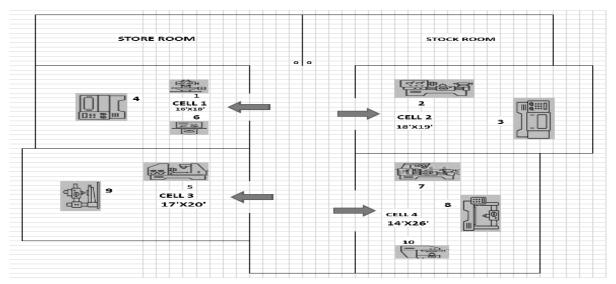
Cell layout design for Bench mark problem 5 -10machines x 20 components Bench mark problem
